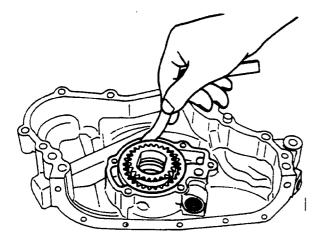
CHECKING CLEARANCE BETWEEN OUTER GEAR AND FRONT CASE
